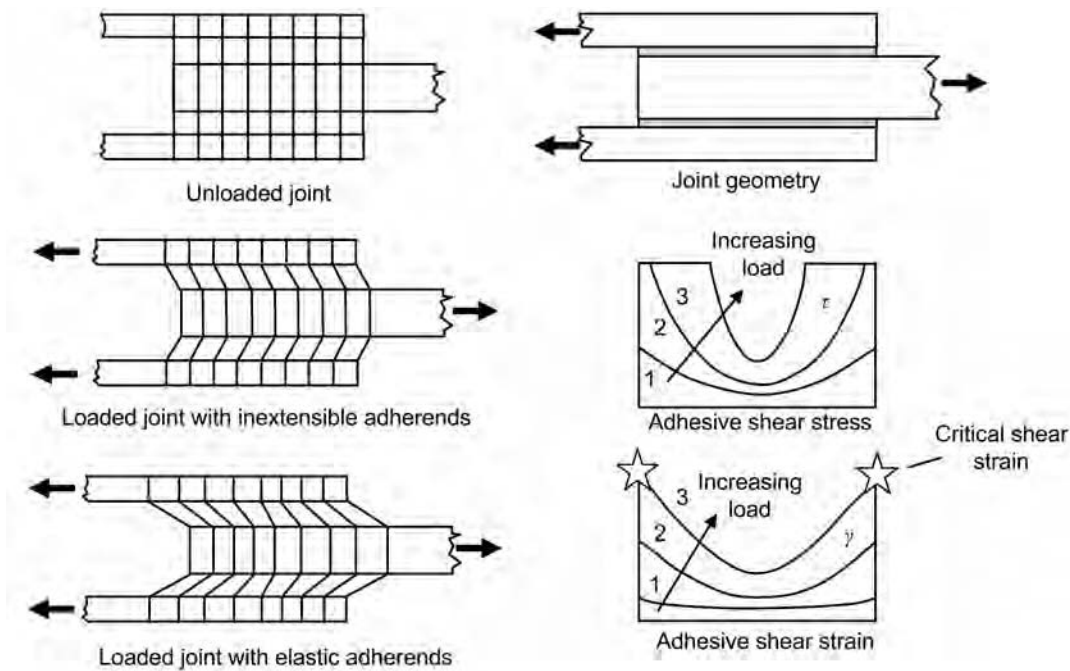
Shear of adhesive in balanced joints. Source: Ref 12
